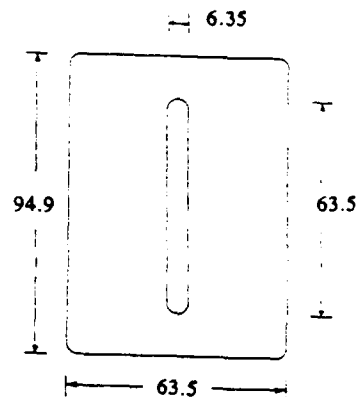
The rectangular jet nozzle face - all dimension in mm.
